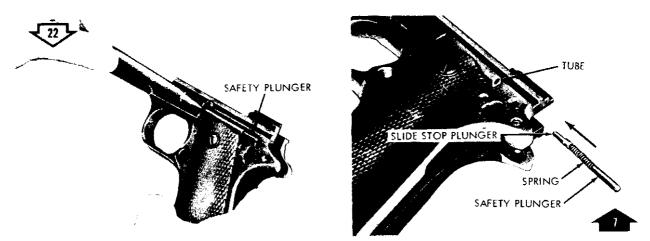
Disassembly/assembly of receiver group (5 of 7)
